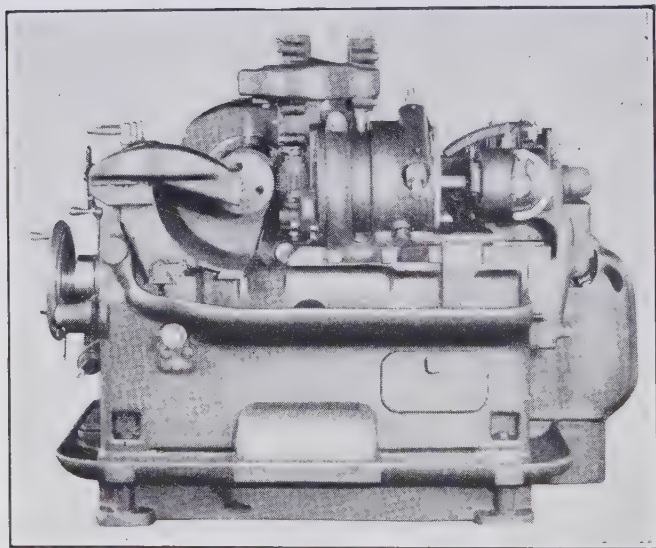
Hobbing machine of rigid construction for cutting automotive gears.
